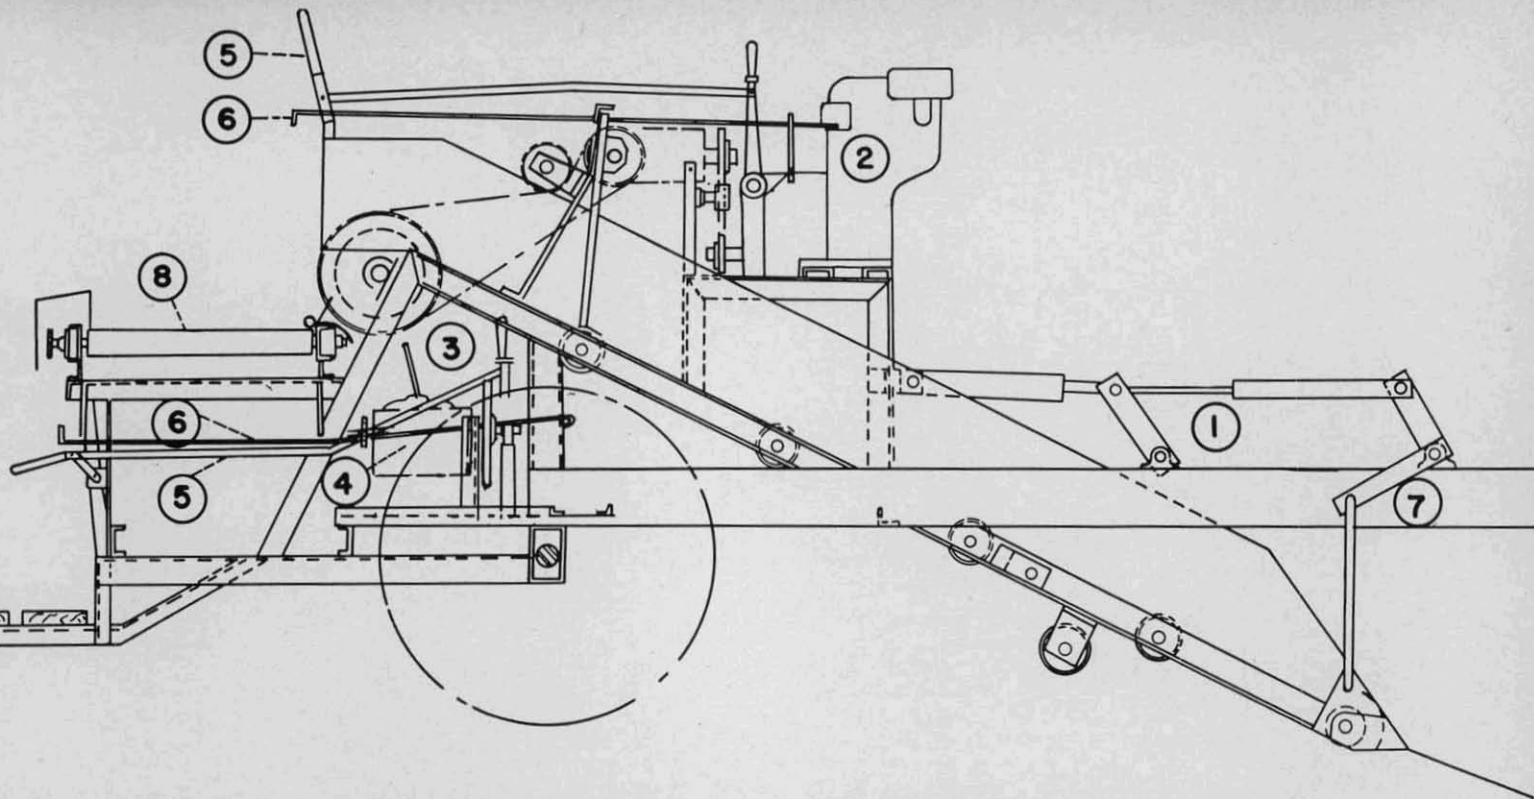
is a sketch giving construction details and shows the relation of the digger chain, rubber rolls, elevator and engines.
